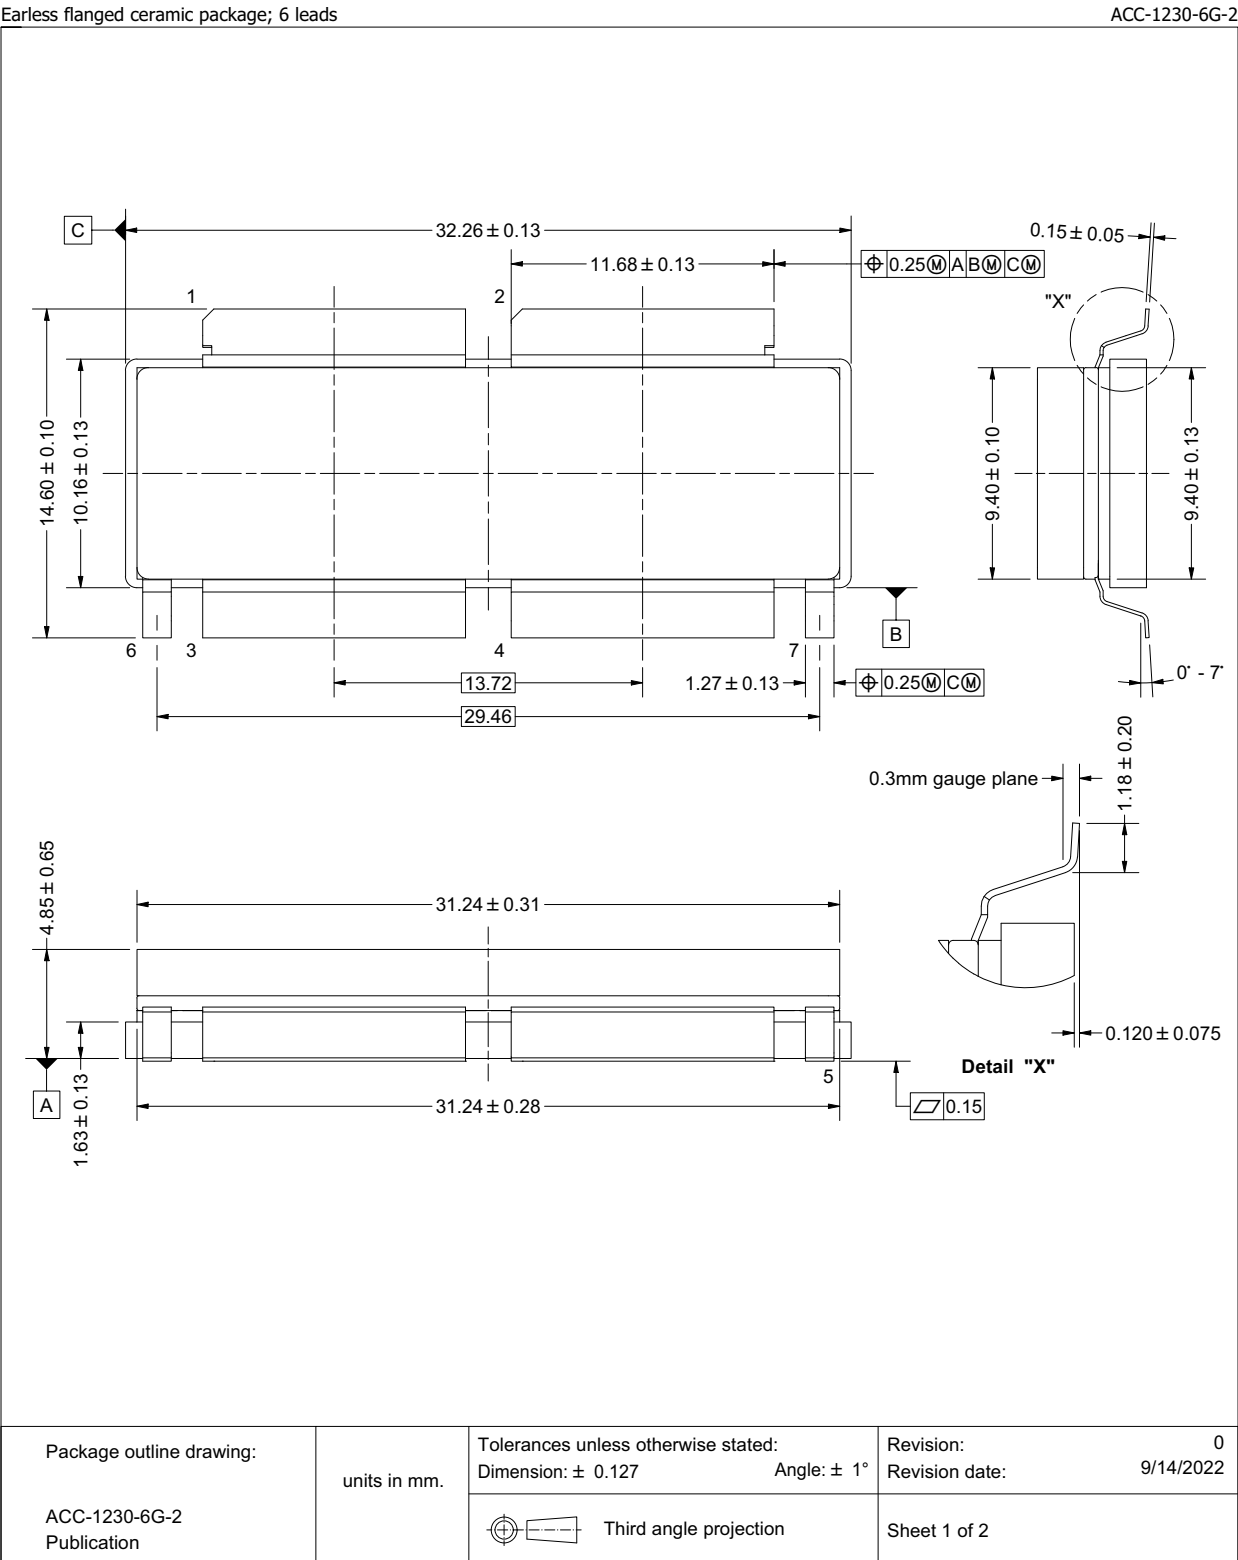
Package outline ACC-1230-6G-2 (sheet 1 of 2)
